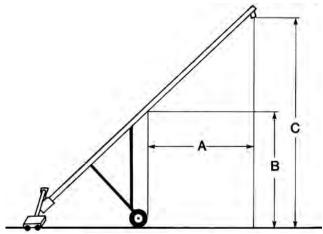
Dimensions: (A) Horizontal Reach, (B) Bin Eave Clearance, (C) Discharge Heights.
